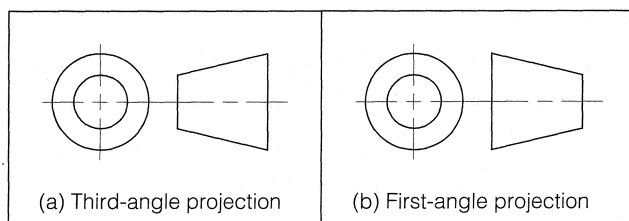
ANSI and ISO Orthographic Projection Symbols
